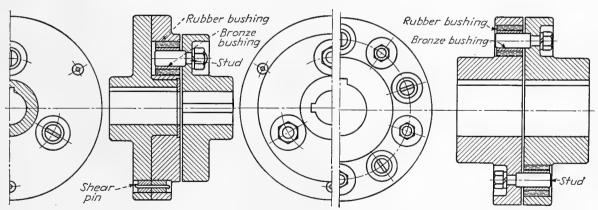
A Foote Gear Works flexible coupling which has shear pins in a separate set of bushings to provide overload protection. The principle is similar to that shown in Fig. 264. Replaceable shear pins are made of softer material than the shear-pin bushings.
